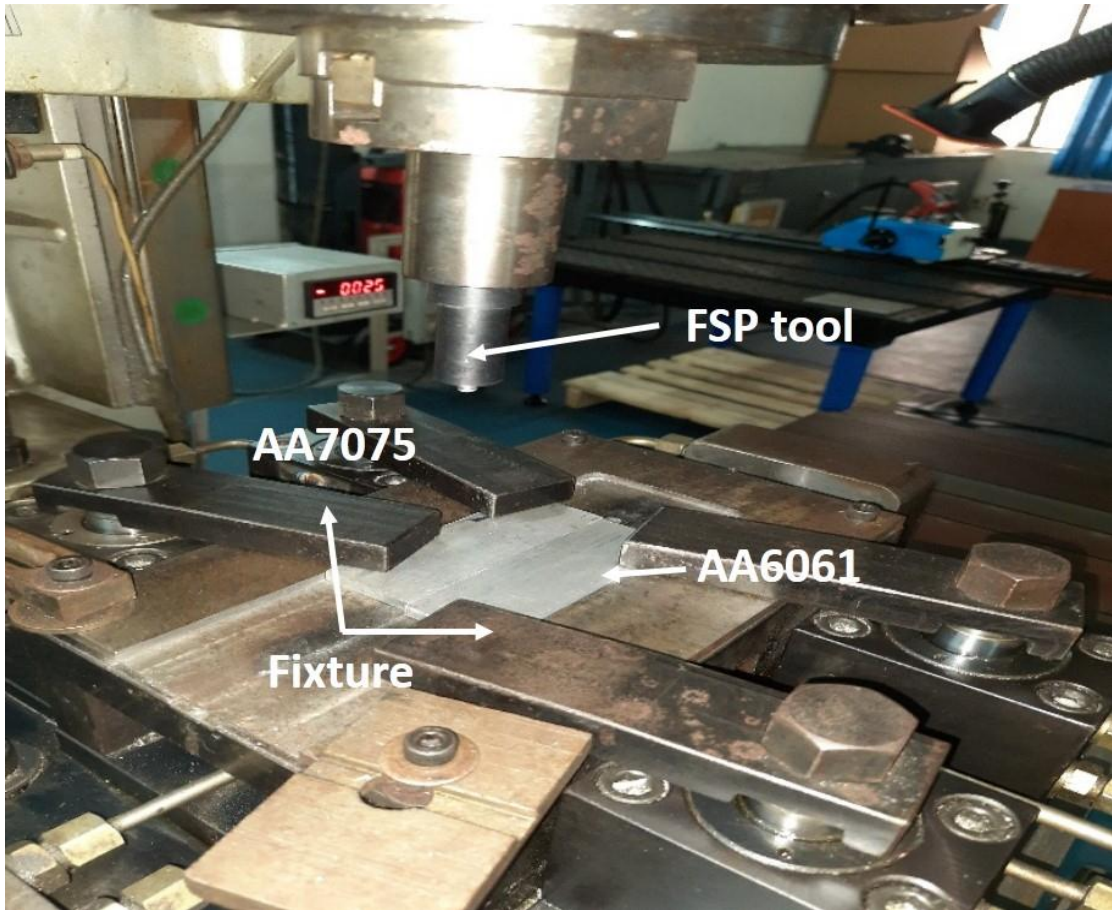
Clamping of base plates on the Fixture of FSW machine
